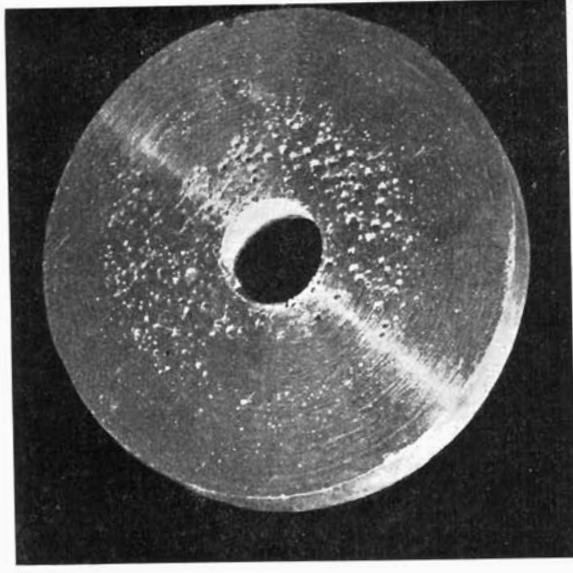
Large gas holes in a 10% tin-bronze sand casting.
